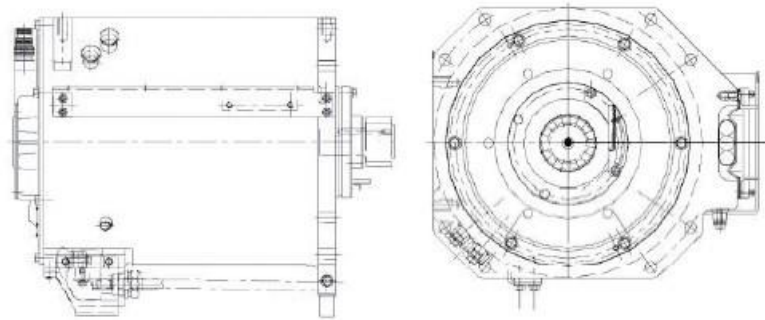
Side and front view plan of the Alstom 4 HGA 1433 motor.[6]
